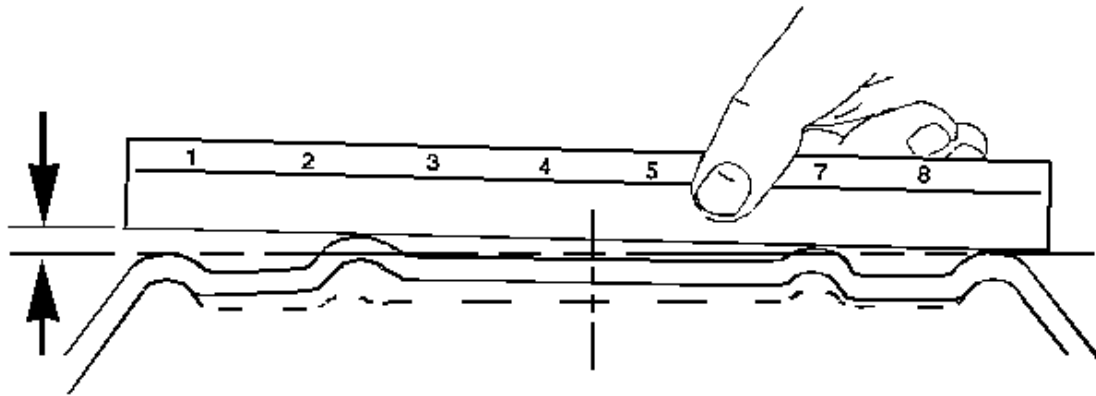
Inspecting Wheel Inboard Mounting Surface
